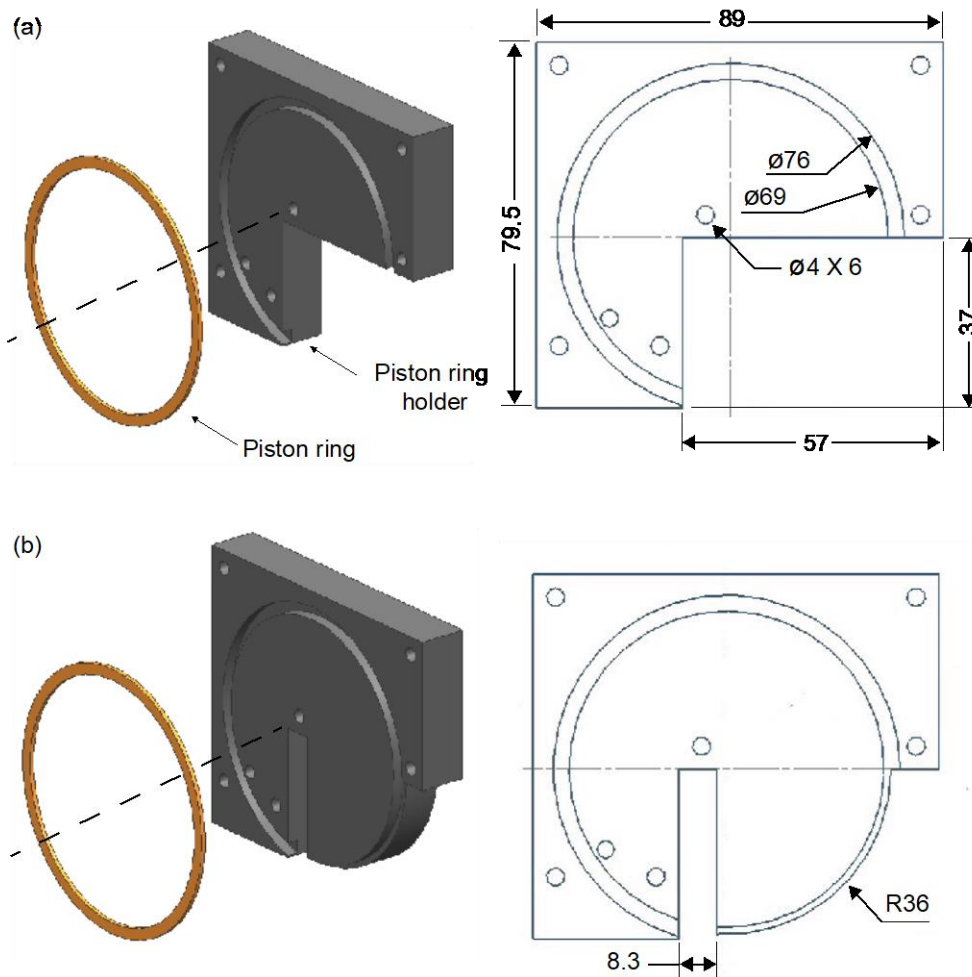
3D model and 2D drawing for piston ring holder design (a) rig 1 (b) rig 2
